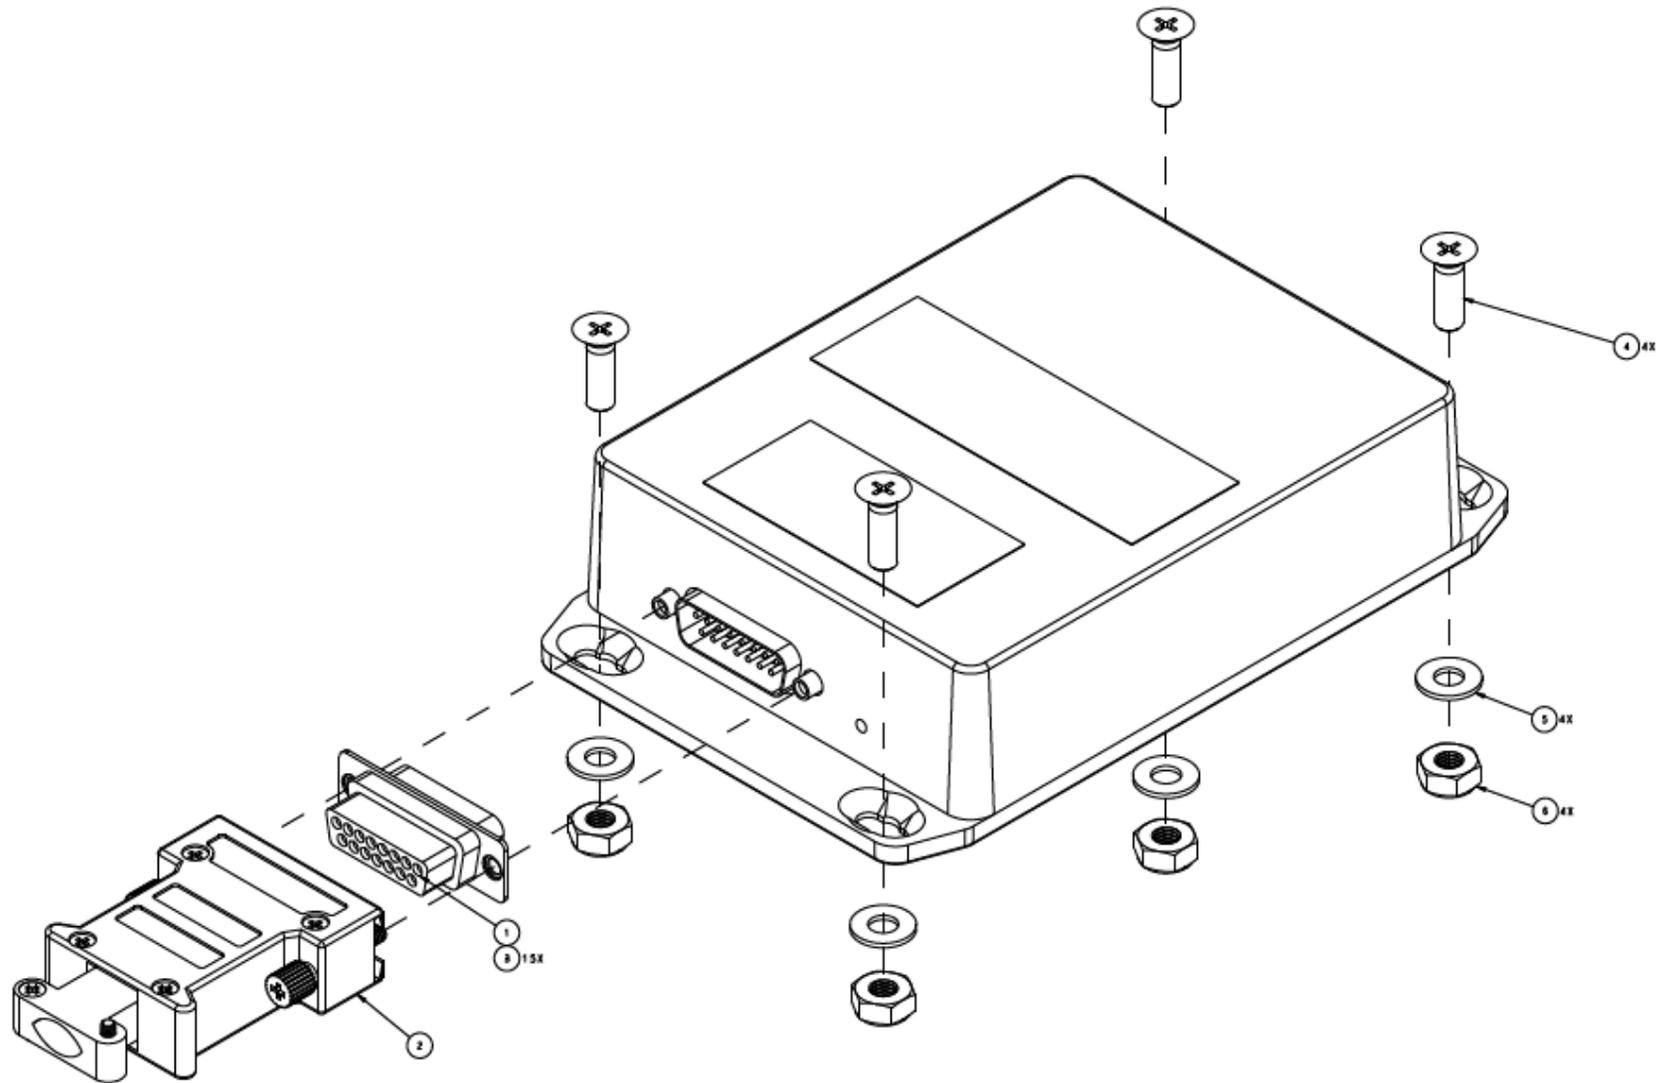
KDC 100EXP Outline and Mounting Drawing (Sheet 2 of 2)
